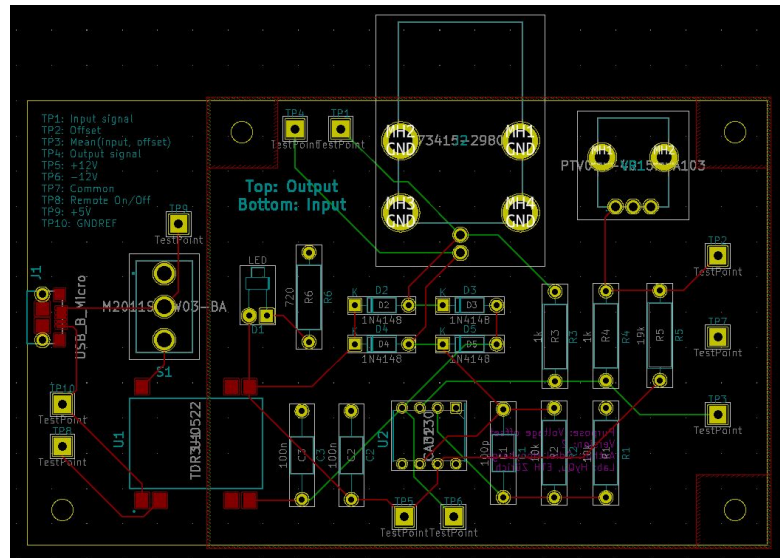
PCB of opamp based tunable voltage offset circuit
